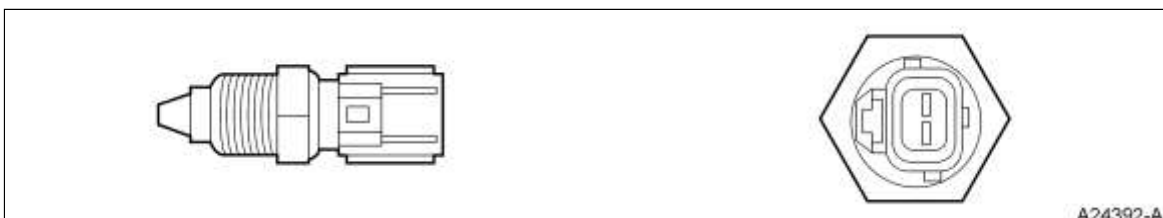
Typical Thread Type Engine Coolant Temperature (ECT) Sensor
